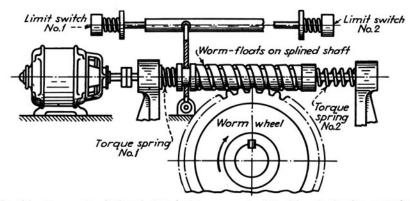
Combination mechanical and electrical torque or load limiting device for control of motor-operated valves, chucks, and clamps. When load becomes sufficiently high to stall wormwheel, the worm sliding on a splined shaft moves axially, similarly to a screw threading through a nut. This movement compresses a calibrated torque spring and opens a limit switch, thereby shutting off the motor.
